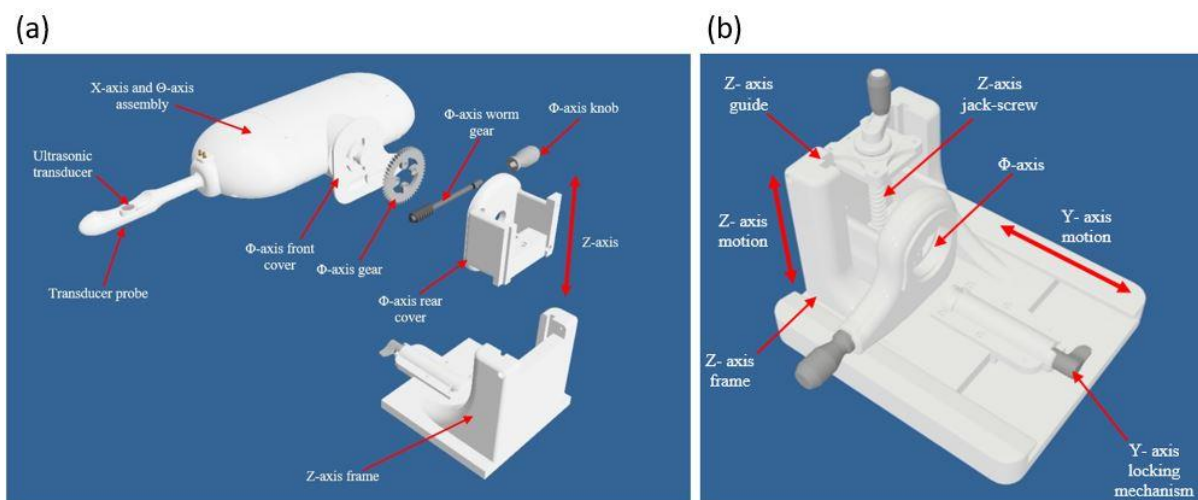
a) Φ -axis exploded view, and b) linear axis to lift the robot up and down (Z-axis) and manual axis to move left and right (Y-axis).
